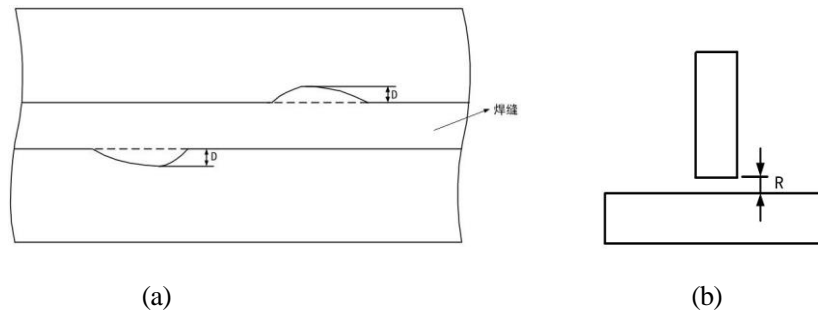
(6)-2 Welding Parameter Self-adaptation Specimen
